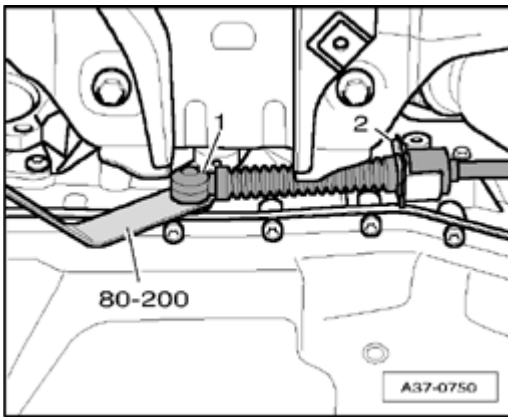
Using Pry Lever - RMV Outside Mirror 80-200 To Pry Ball Socket On Selector Lever Cable Off Selector Shaft Lever
